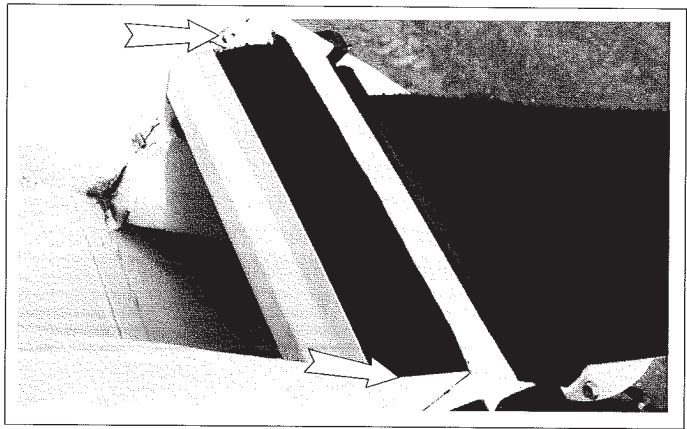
CONVEYOR ALIGNMENT (TYPICAL)
